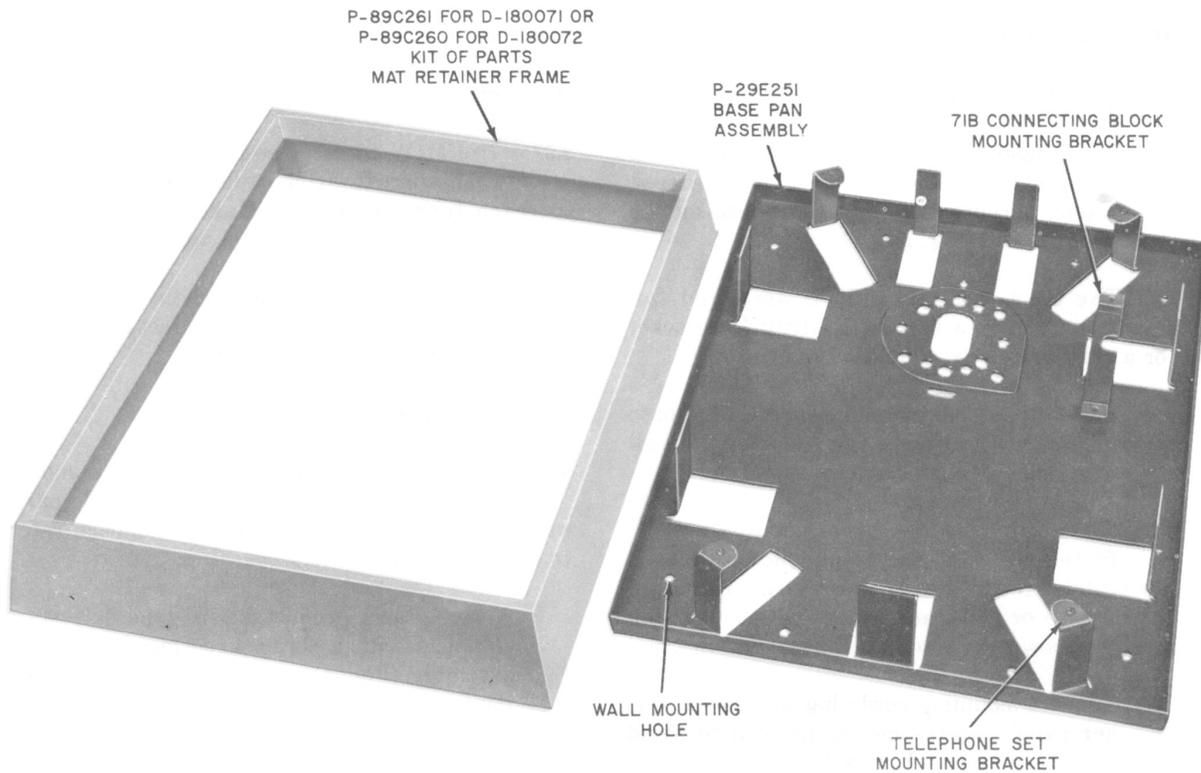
D-180071 or D-180072 Kit of Parts For Surface Mounting
